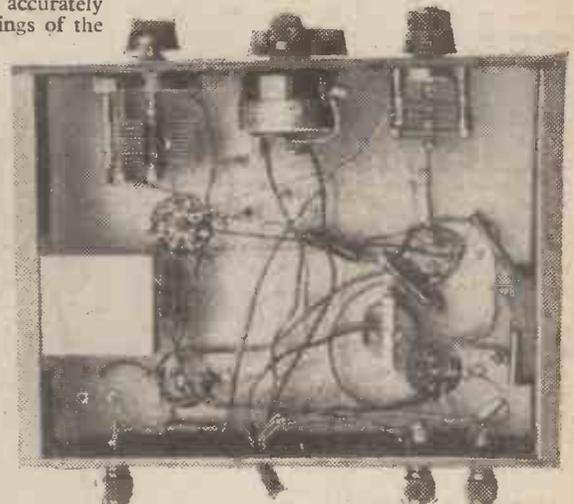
Sub-chassis view of the Band-spread S.W. Three.
